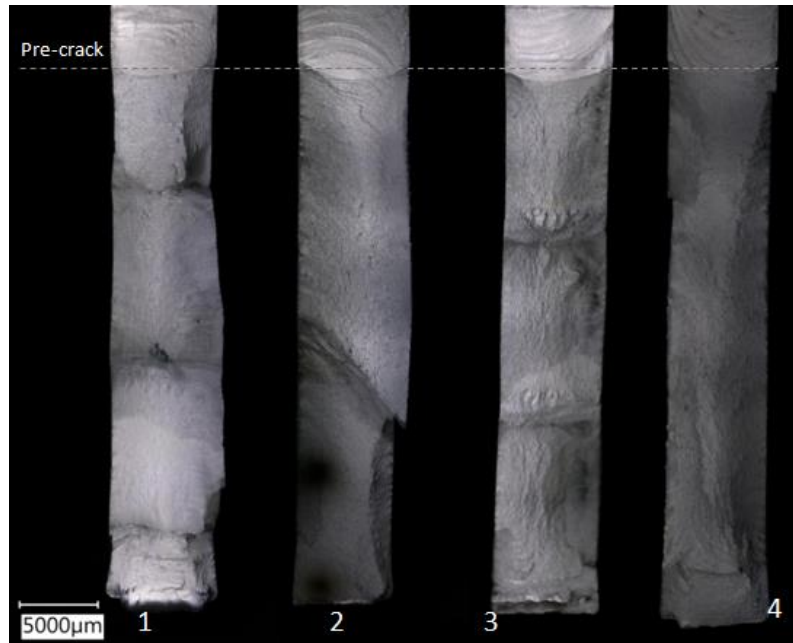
Inner fracture surfaces of thinner/faster/cast build
